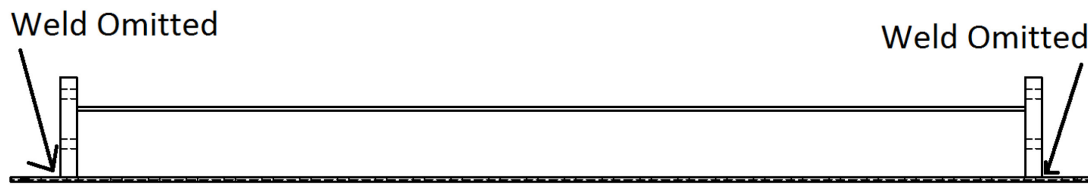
Side view of frames test specimen showing omitted welds.
